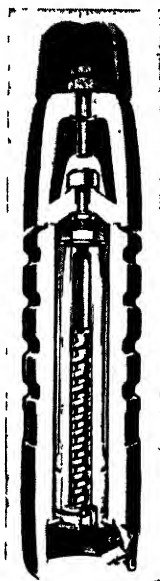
Cutaway view of assembled expulsion arrester showing open series gap and arcing chamber. (Courtesy Westinghouse Electric Corp.)
